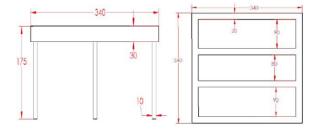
Front (left) and top (right) view of stand for supporting updraft gasifier (All dimensions in mm).
